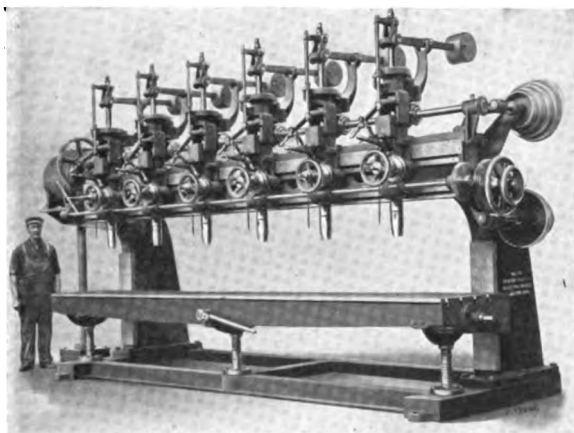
No. 2 Heavy Multiple Spindle Drilling Machine
